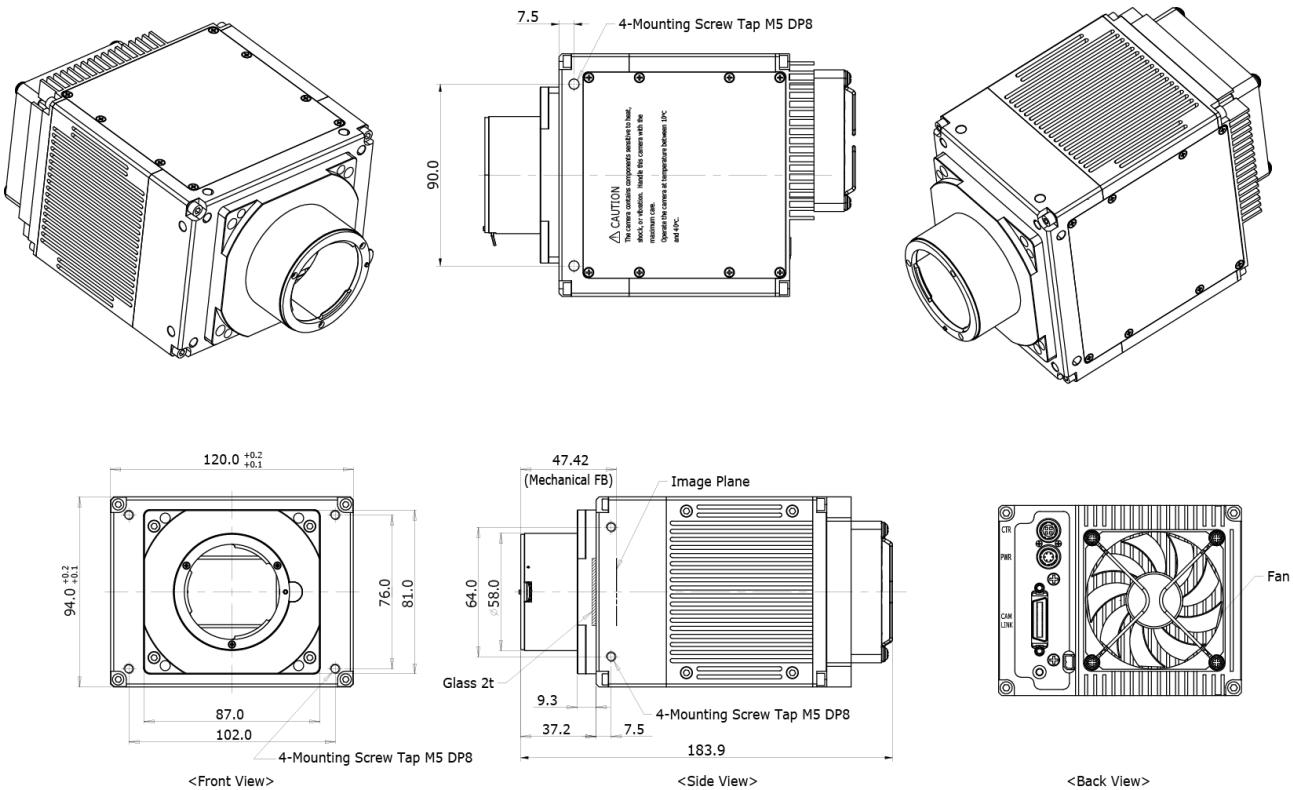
VNP Camera Link Mechanical Dimension (F-Mount)
